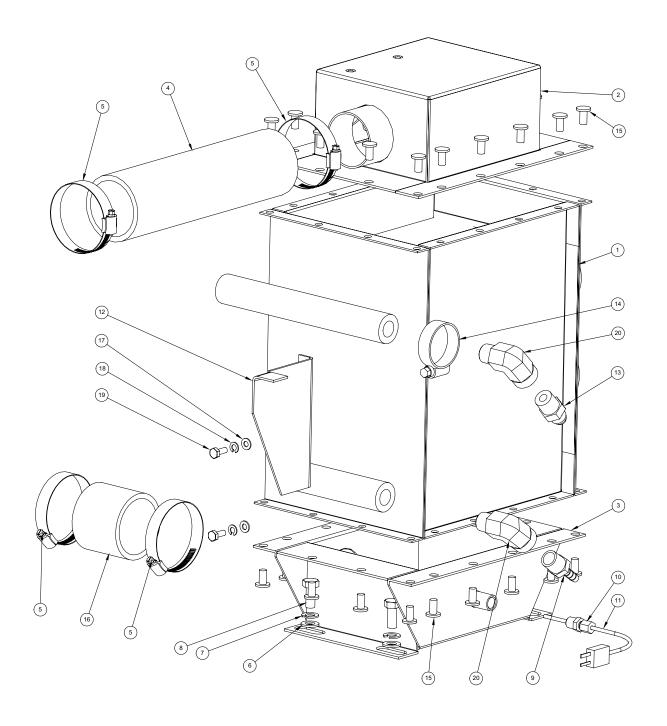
Compressor Assembly D-6157 Rev -
